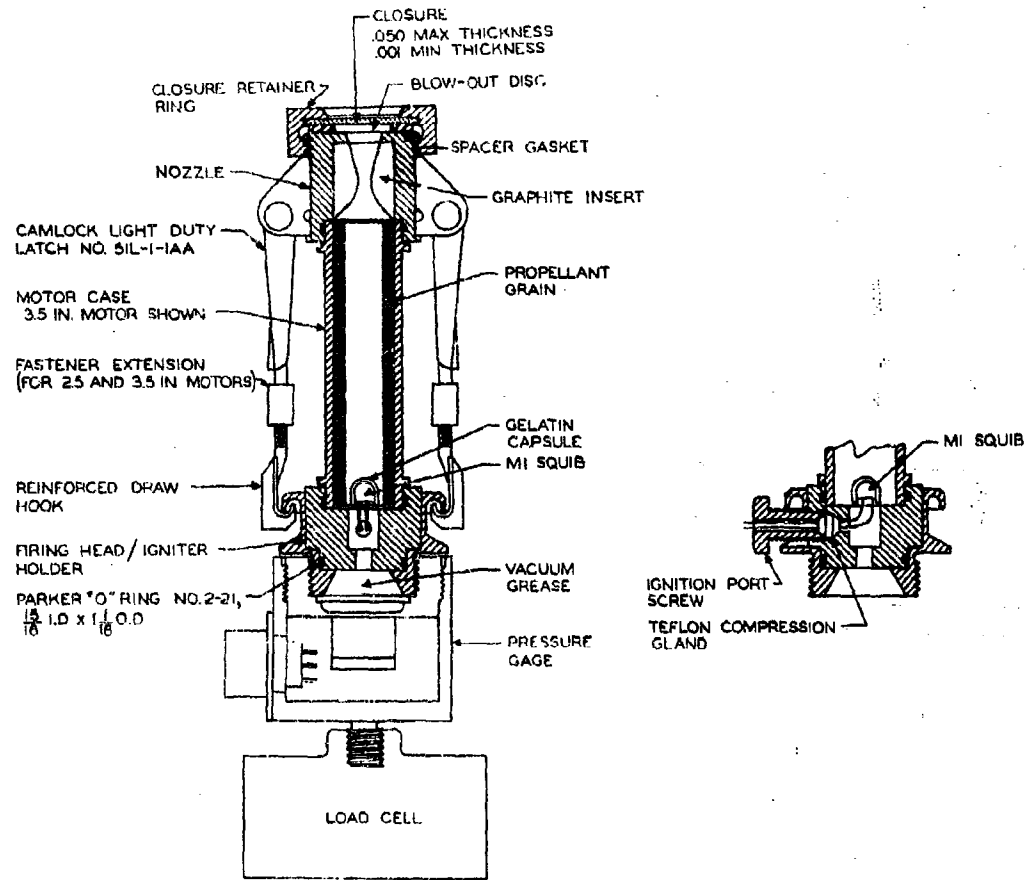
Clamp-type .75C.50-3.5 motor firing assembly.
